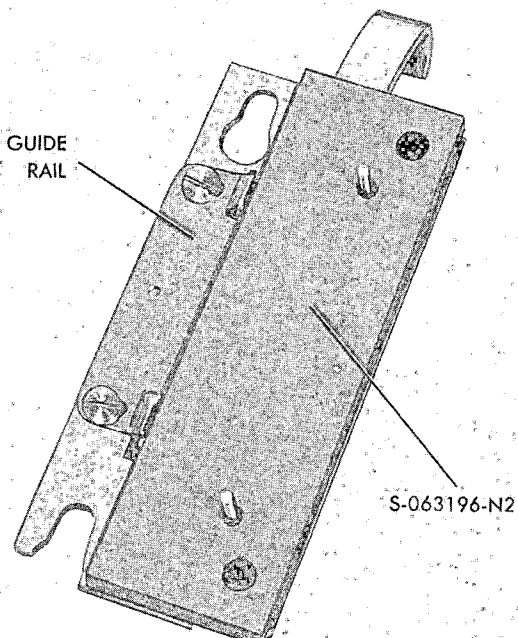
Adjusting Aperture Plate Fixed Guide Rail
